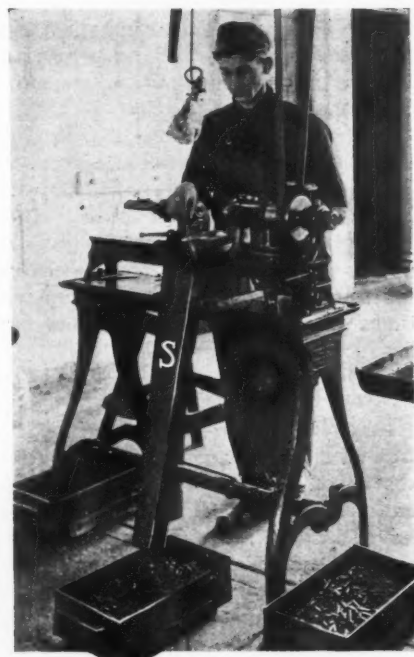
Drilling the main jets at the rate of 1200 a day, or two per minute. These jets come to the lathe man from the automatic machine which finishes the outside, but the inside must next be drilled. A small chuck grips the piece quickly, and the drilling is simply a matter of pressing the chuck and nozzle against the drill. To save the operator's time in disposing of the pieces which he has drilled, the chute S is provided which directs them into a tray below.
